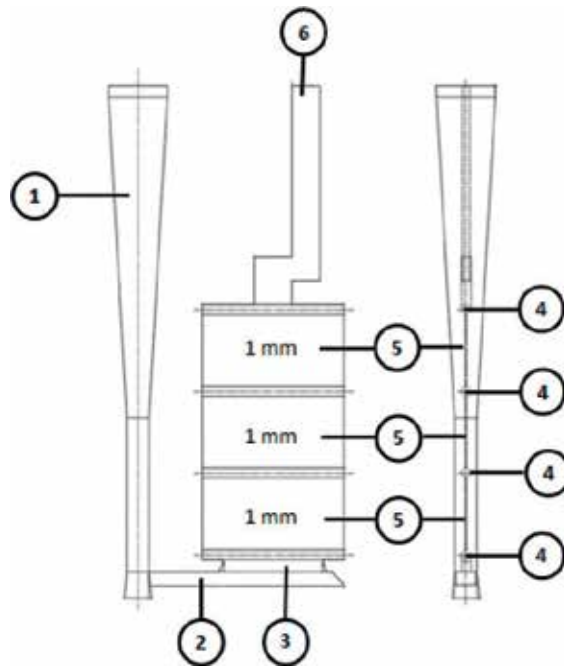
Improved design [34]. 1—Down sprue; 1a—supporting gate; 2—runner; 3—ingate; 4—riser; 5—plate; 6—gas tunnel.
